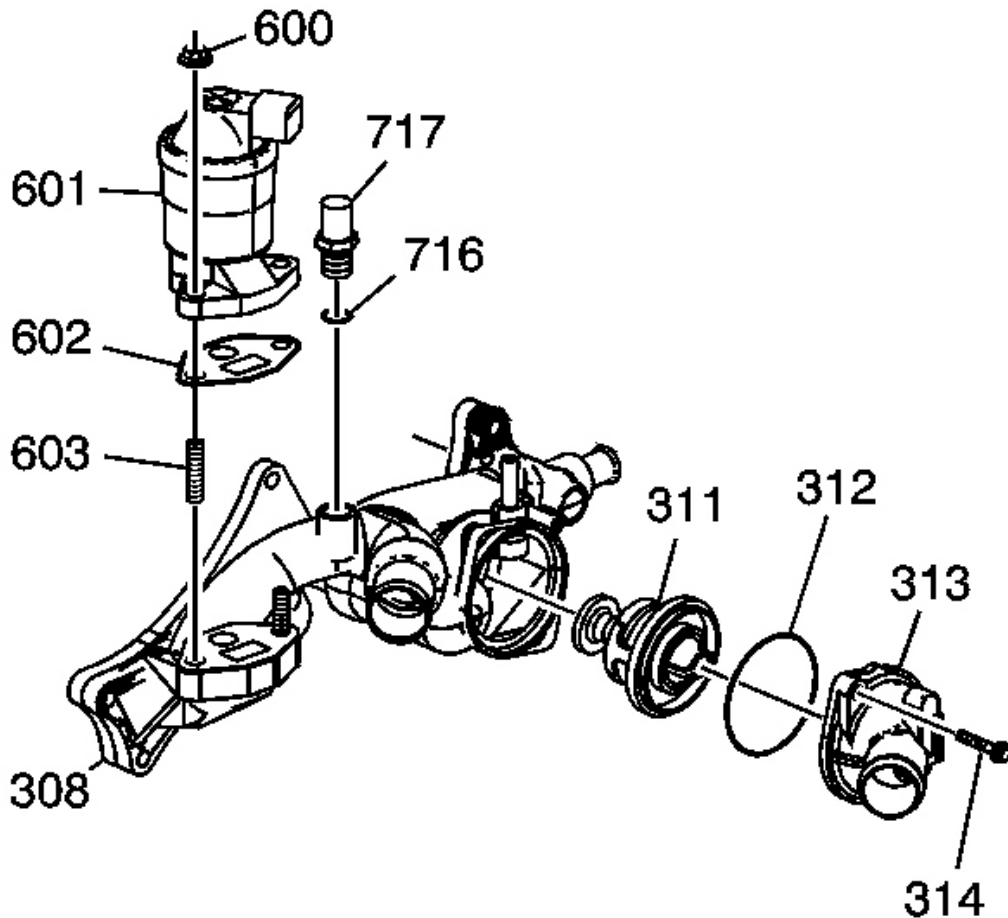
Identifying Nuts, Exhaust Gas Recirculation, Valve, Gasket & Studs
